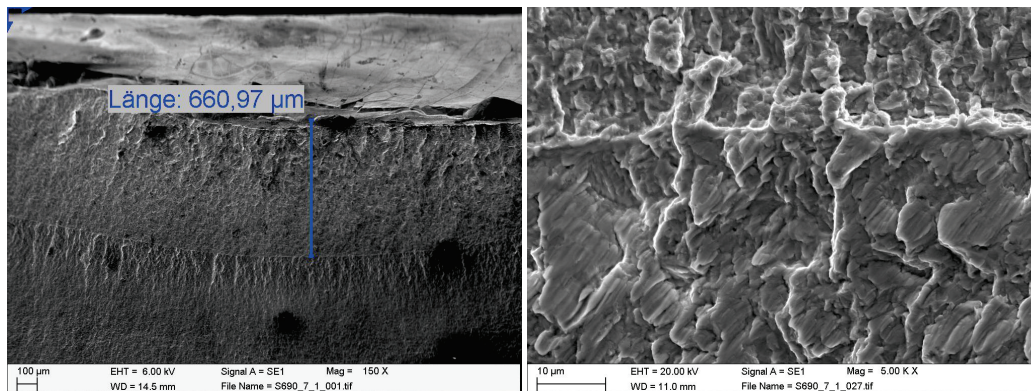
Fracture surface of specimen number 2 using scanning electron microscopy
